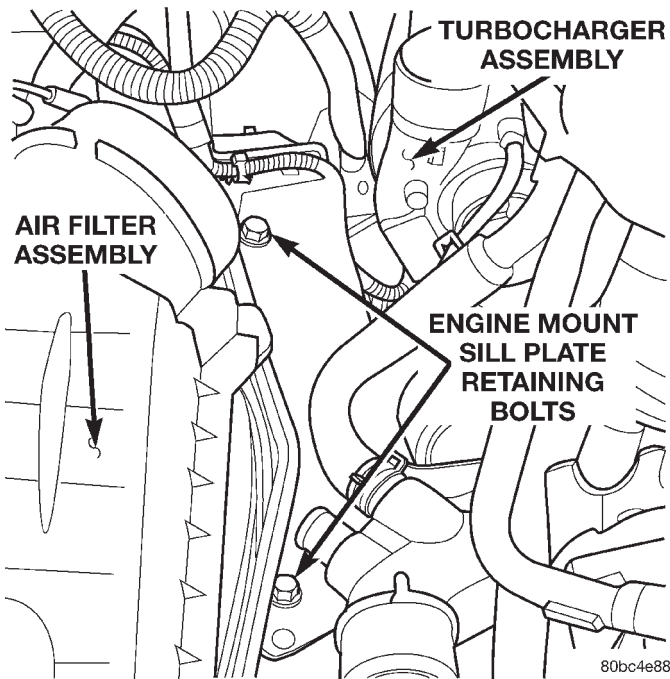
Engine Mount Sill Plate Bolts - Rightside
